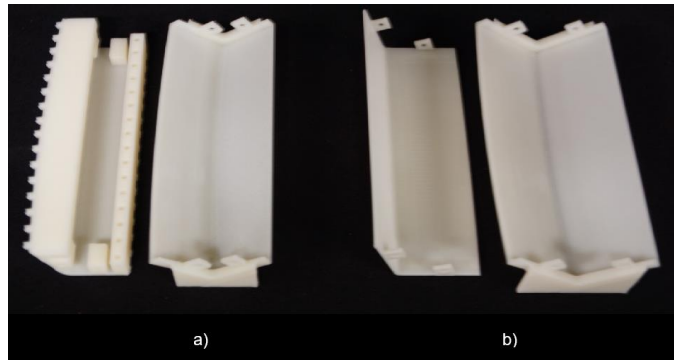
Fabrication molds for the SMA based SSC actuator: (a) first casting molds, (b) second casting molds
